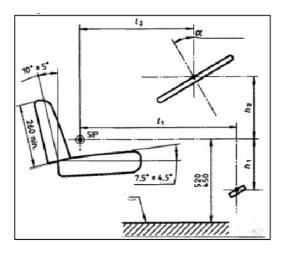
Side view of the seat. Source: ISO 5353.
